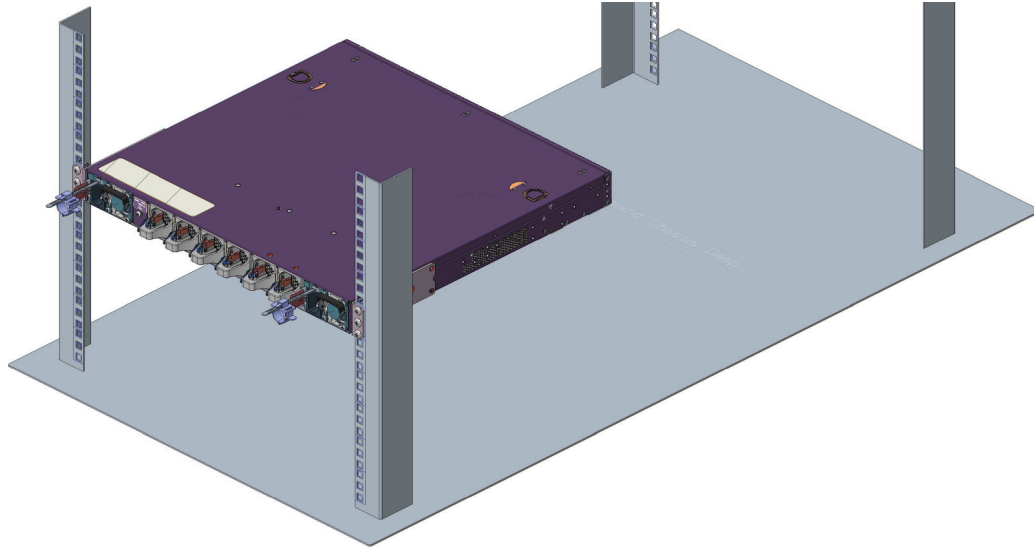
Rear Flush-Mount: Attaching the Mounting Brackets
